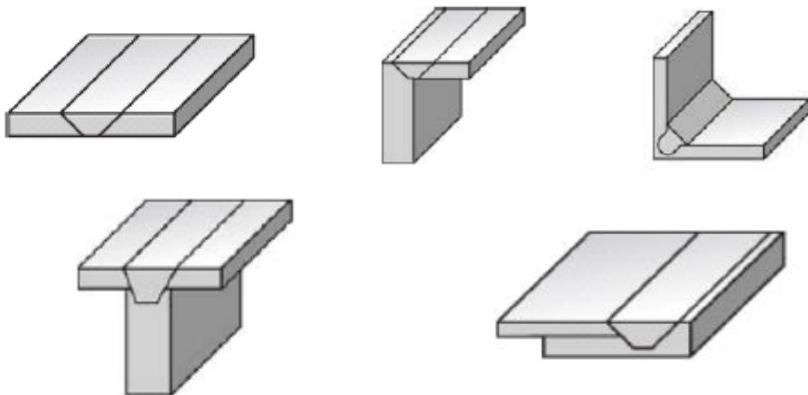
Examples of common welds obtained through FSW: (a) butt weld, (b) and (c) corner fillet, (d) T fillet and (e) lap fillet [2-4].
